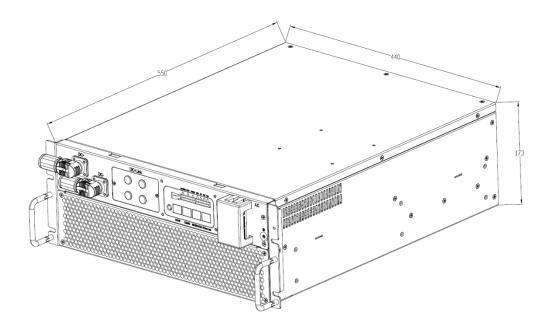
Dimensions of PWS2-30P-EX modular machine model (unit: mm)
